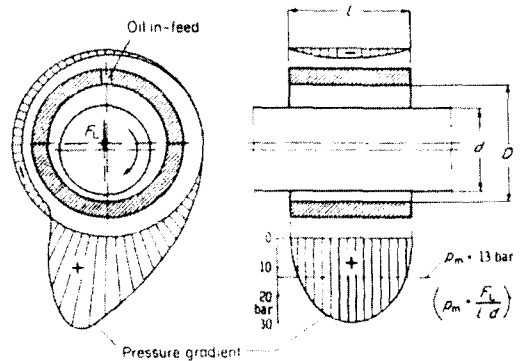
Shaft displacement and pressure gradient of the lubrication film in a circular plain bearing
